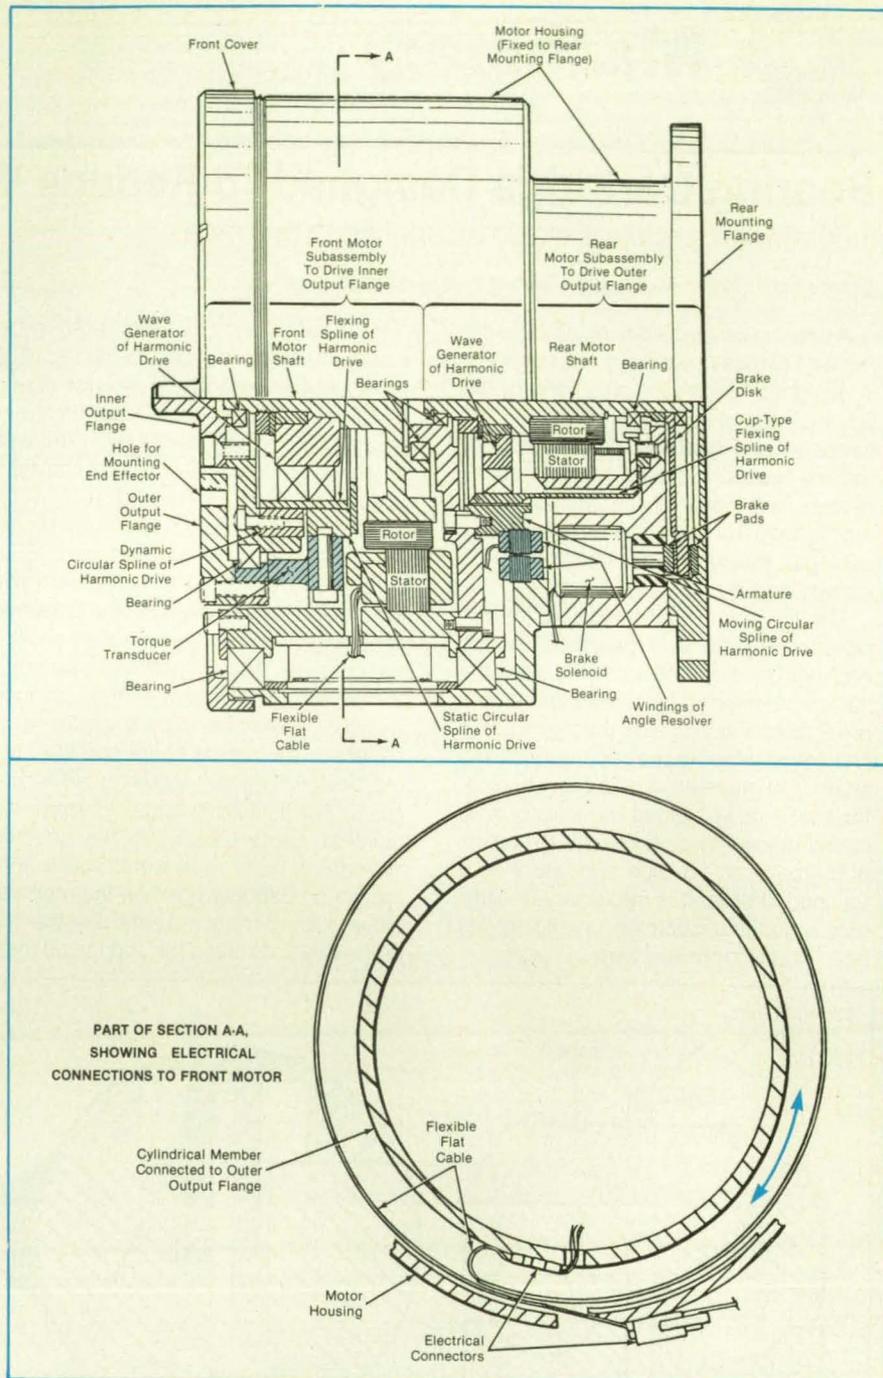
The Rear and Front Motor-Drive Subassemblies provide, respectively, (1) controlled angular positioning of the outer output flange over a range of $\pm 180^\circ$ and (2) unlimited rotation of the inner output flange relative to the outer output flange.
